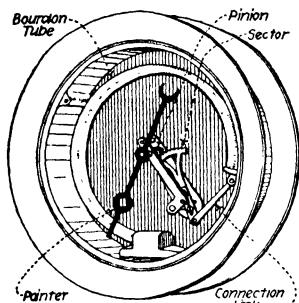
Interior view of steam gage with single Bourdon tube. (Ashton Valve Co.)
